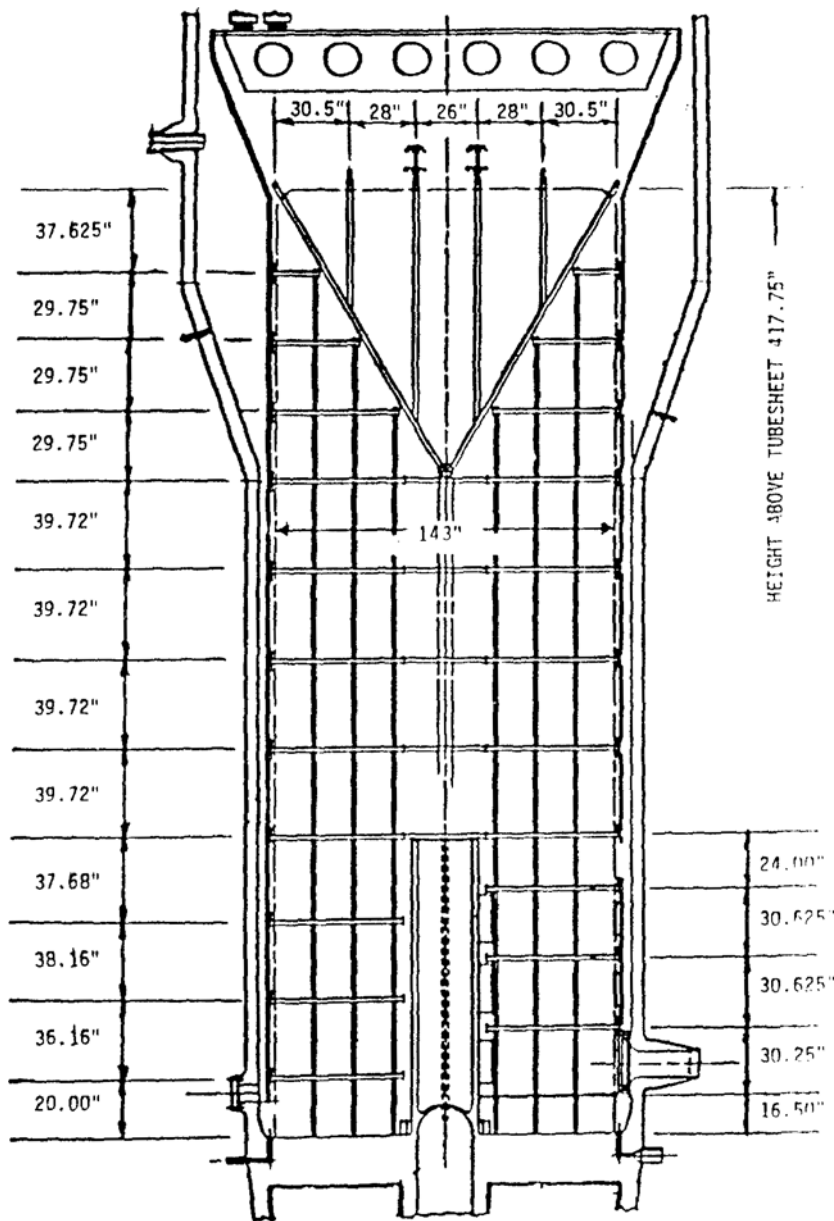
Tube supports arrangement YGN 3/4 steam generator.
